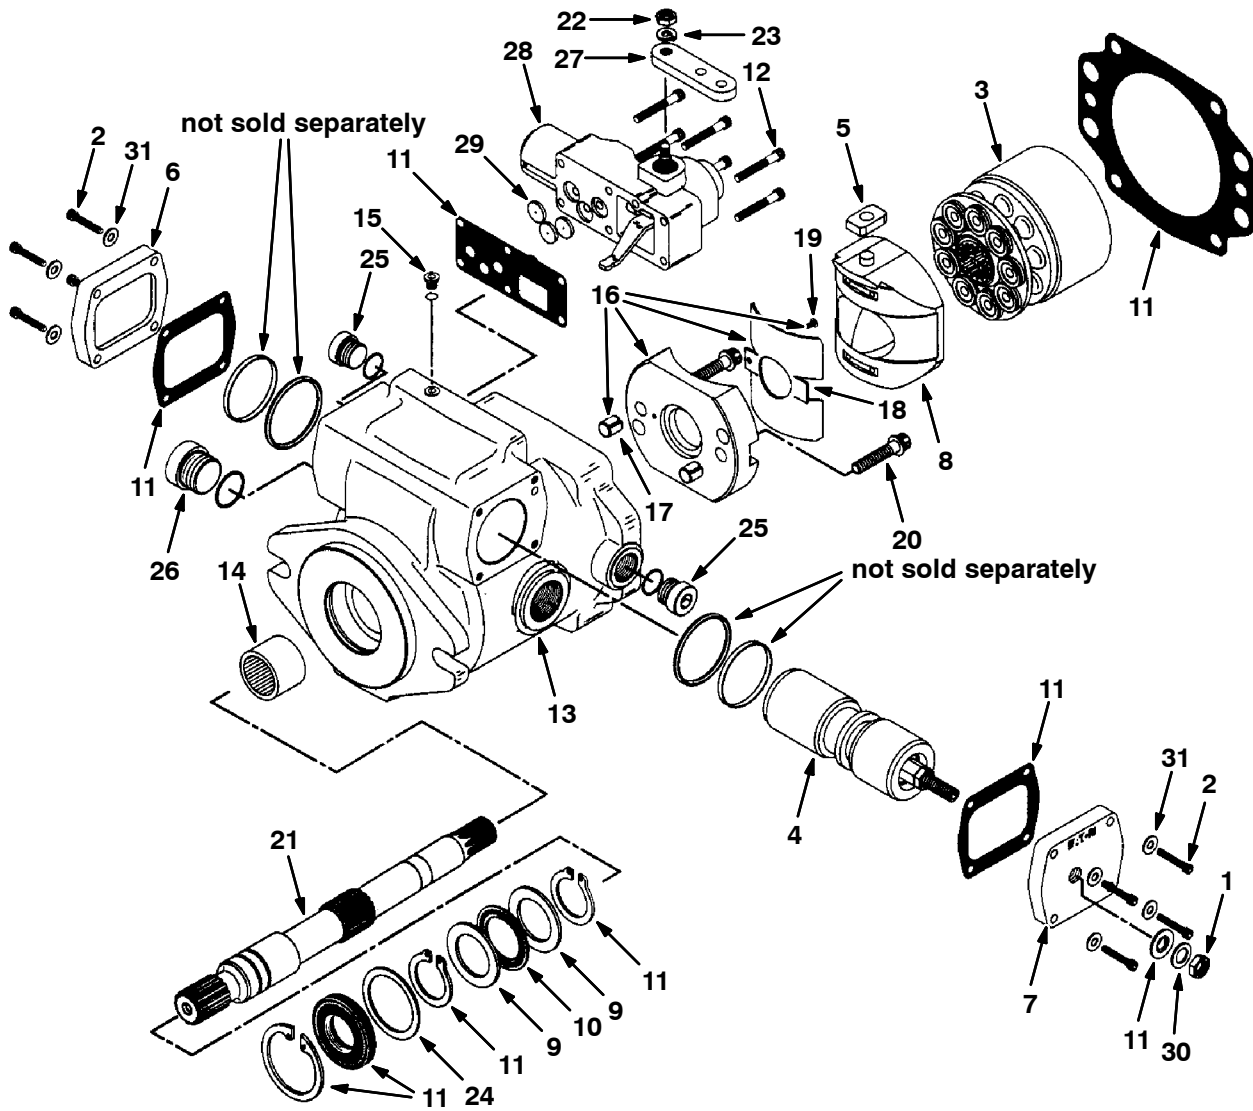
Hydraulic Piston Pump Breakdown, 74163
